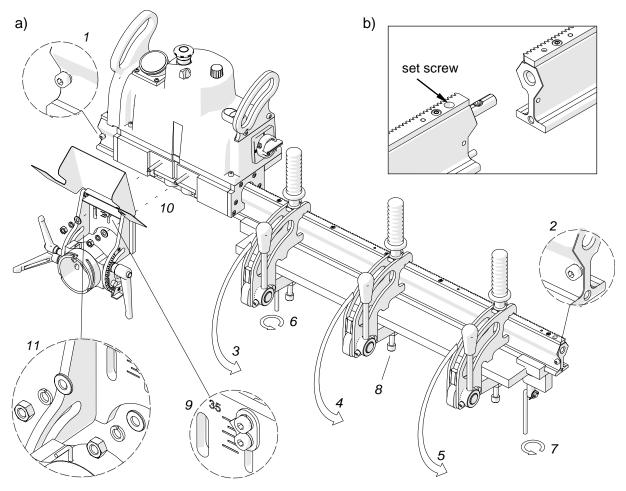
Placing the machine on the plate (a); mounting additional guide segments (b)
